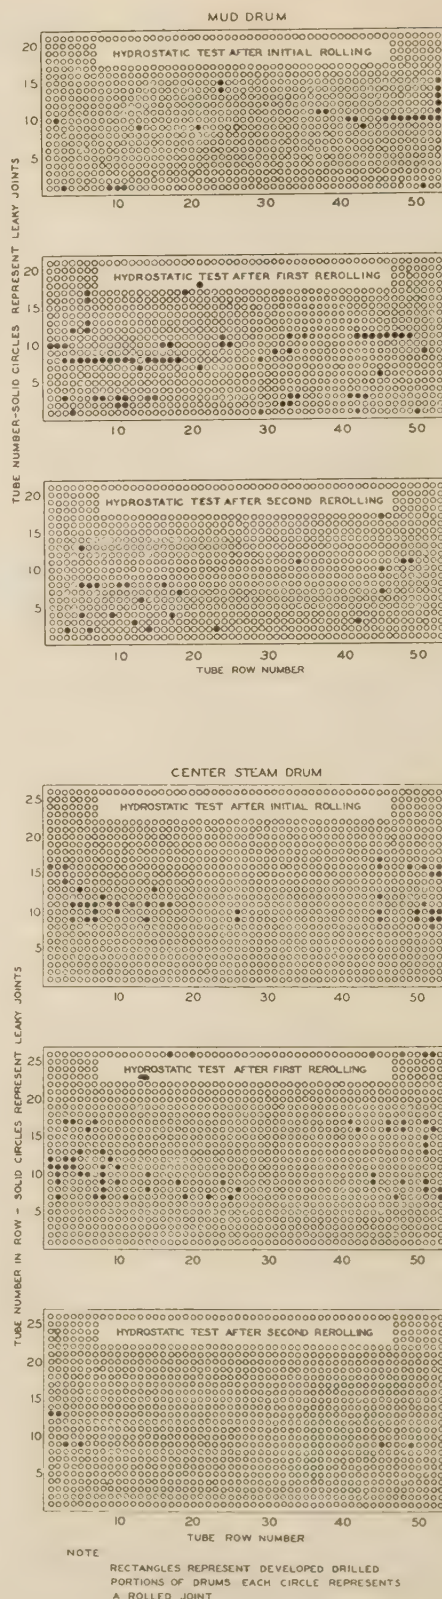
RECORD OF ROLLING-IN JOINTS IN TWO DRUMS OF A BOILER USING ONE CONVENTIONAL METHOD
